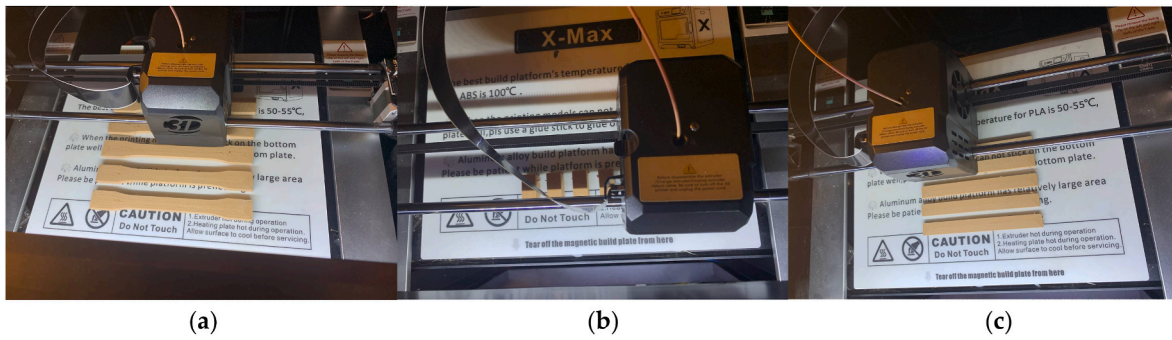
3D Printed specimen design of (a) ASTM D638 (Tensile), (b) ASTM D695 (Compression) and (c) ASTM D790 (Flexural) with a fiber kenaf content of 5 wt%.
